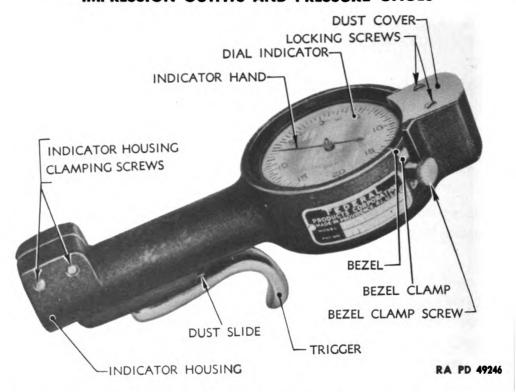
Indicator Housing Assembly with Grip Handle Removed
